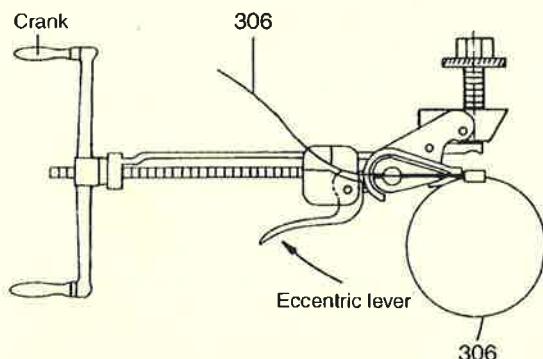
Tighten the joint clamp with the clamping tool Band-It and adapter J050
